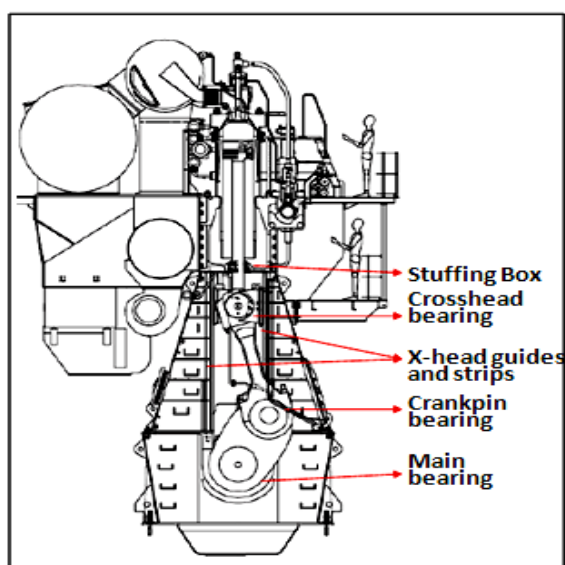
Hot spots in crankcase of two stroke slow speed diesel engine
